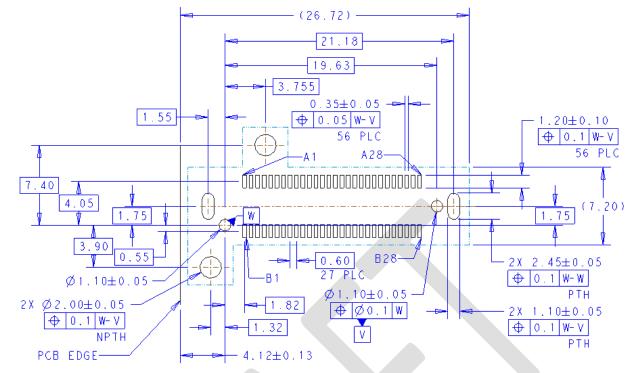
1C RIGHT ANGLE ORTHOGONAL SMT CONNECTOR FOOTPRINT
